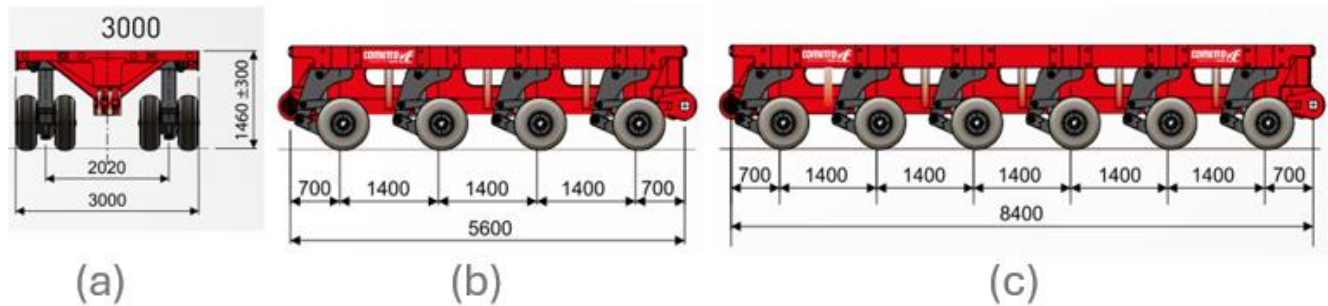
Cometto SPMT (a) Section view (b) Elevation view 4/4/3.00 Evo3 (70T) (c) Elevation view 6/4/3.00 Evo3 (70T) (Data source: [1]).
